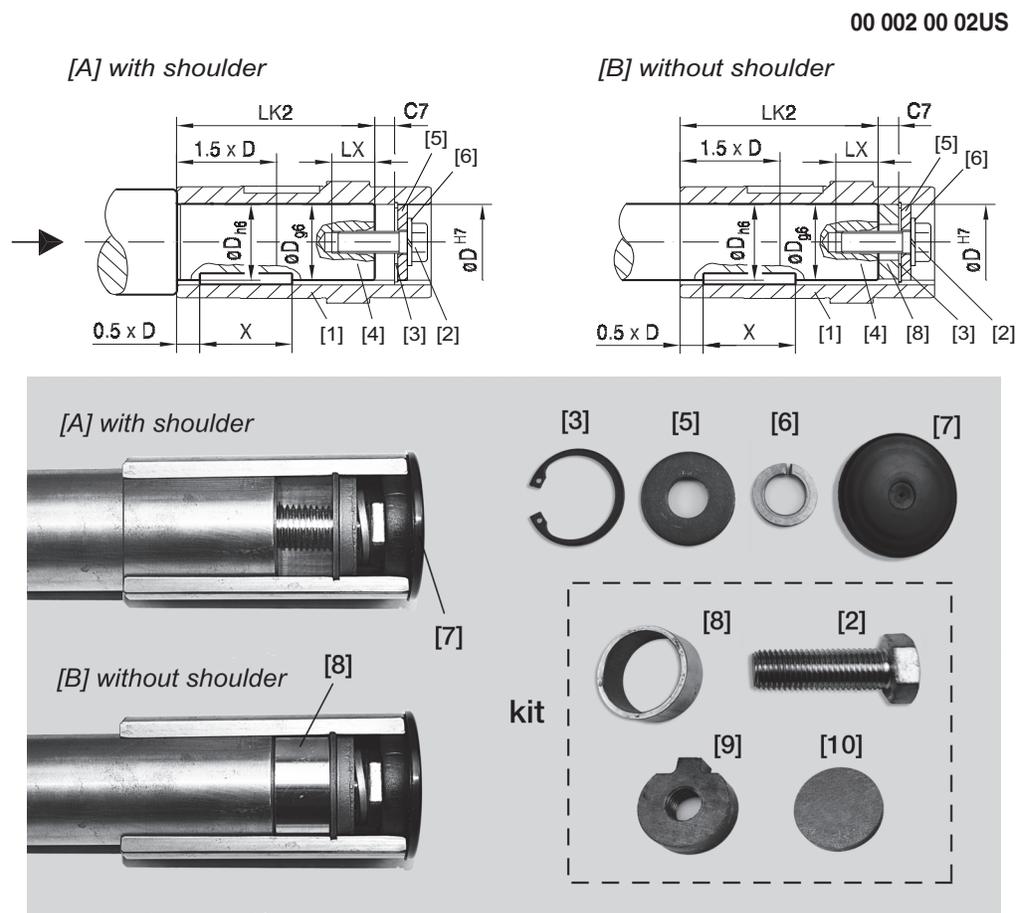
Customer shaft with contact shoulder (A) and without contact shoulder (B)
